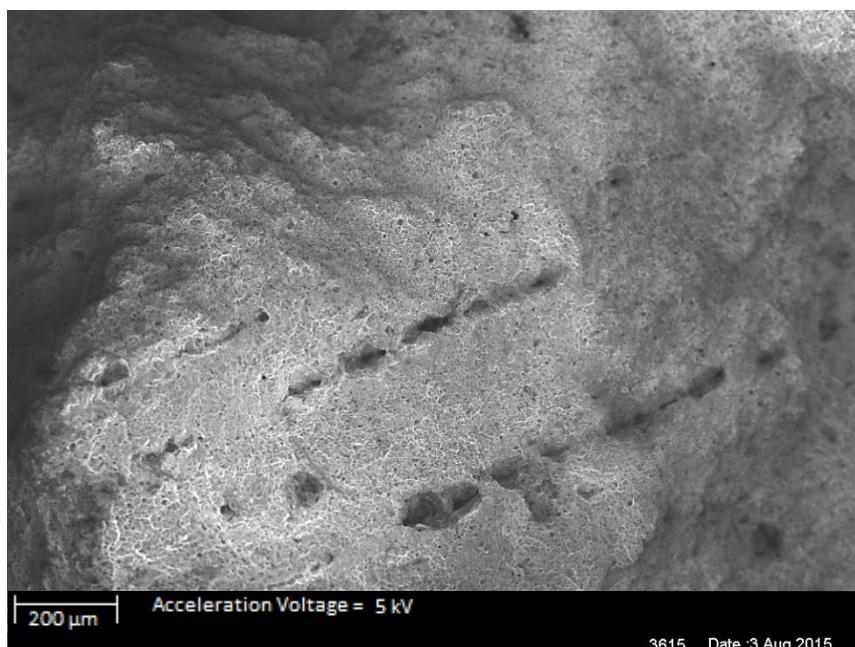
SEM image of linear features observed on the tensile sample fracture surface of sample 1 (Heat treated for 579h at 635°C prior to welding and a 672h PWHT at 635°C).
